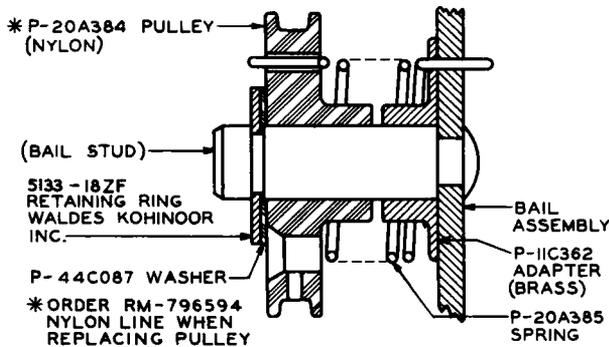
B - INTERMEDIATE STYLE ASSEMBLY (USING THE D-179647 CONVERSION KIT)
